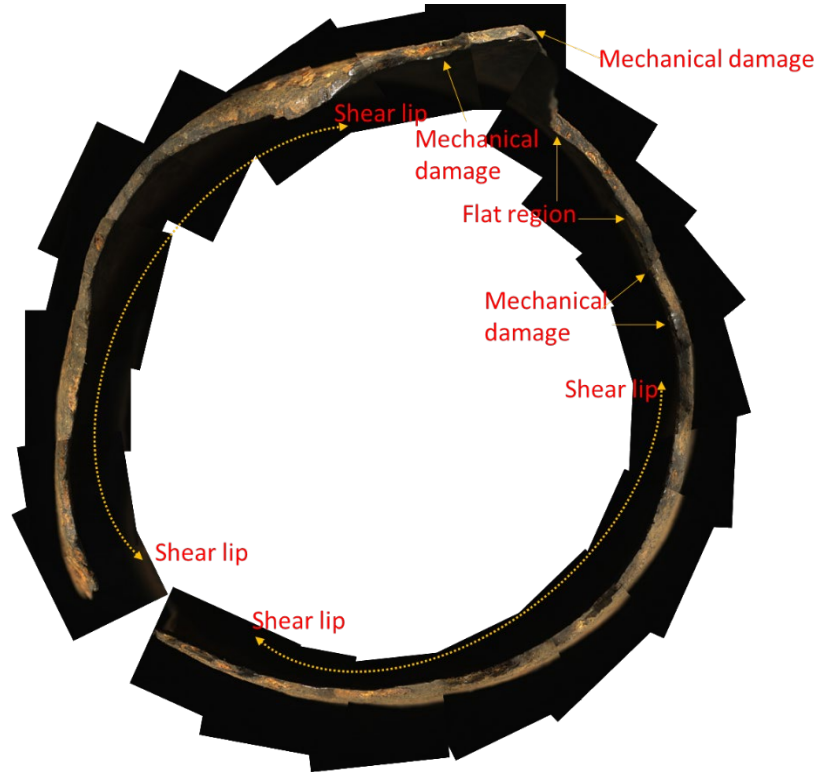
Stitched Stereoscope Image of C001A-1 Circumferential Fracture Surface
